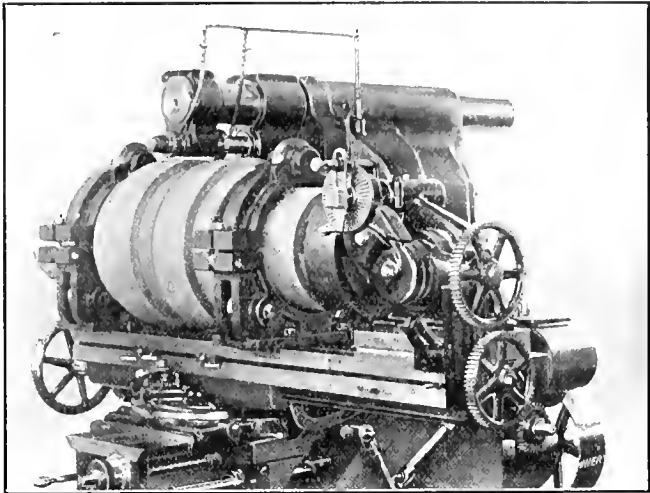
Milwaukee Miller arranged for Cutting Cross-grooves in a Heavy Roll.
